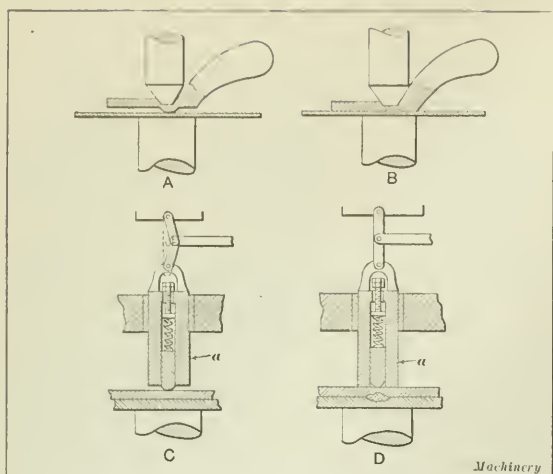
Diagram illustrating Principles of welding Thick to Thin Metal and welding Thick Sheets of Metal
